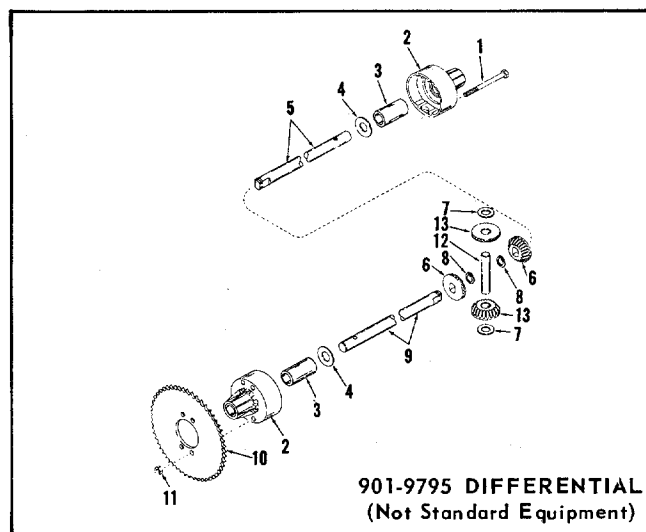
DIFFERENTIAL-EXPLODED VIEW
